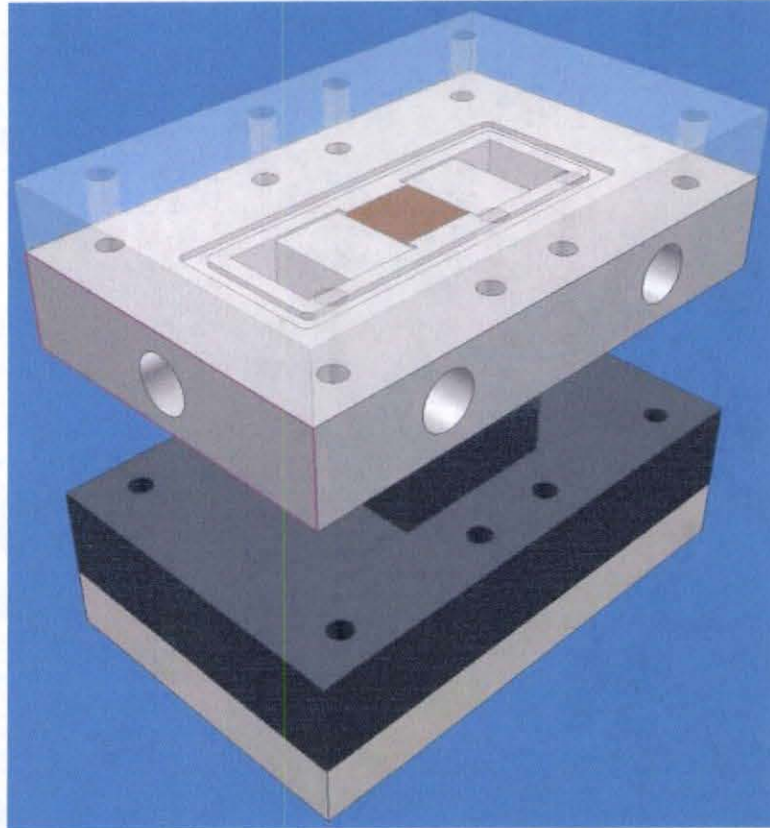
Solid model of the two-phase heat sink test section assembly
